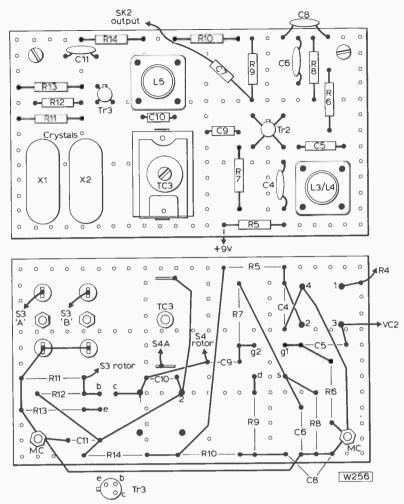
Containing both crystals, the Oscillator/mixer board shown to the left is constructed from 0.15in. matrix plain perforated board.
